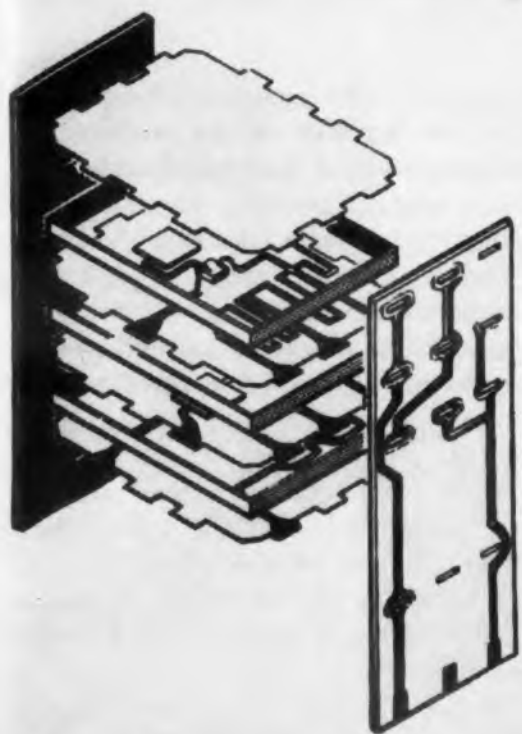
An exploded view of Sylvania's module assembly showing individual wafers, spacer elements and the silk-screened interconnection boards which electrically and physically interlock wafers.
